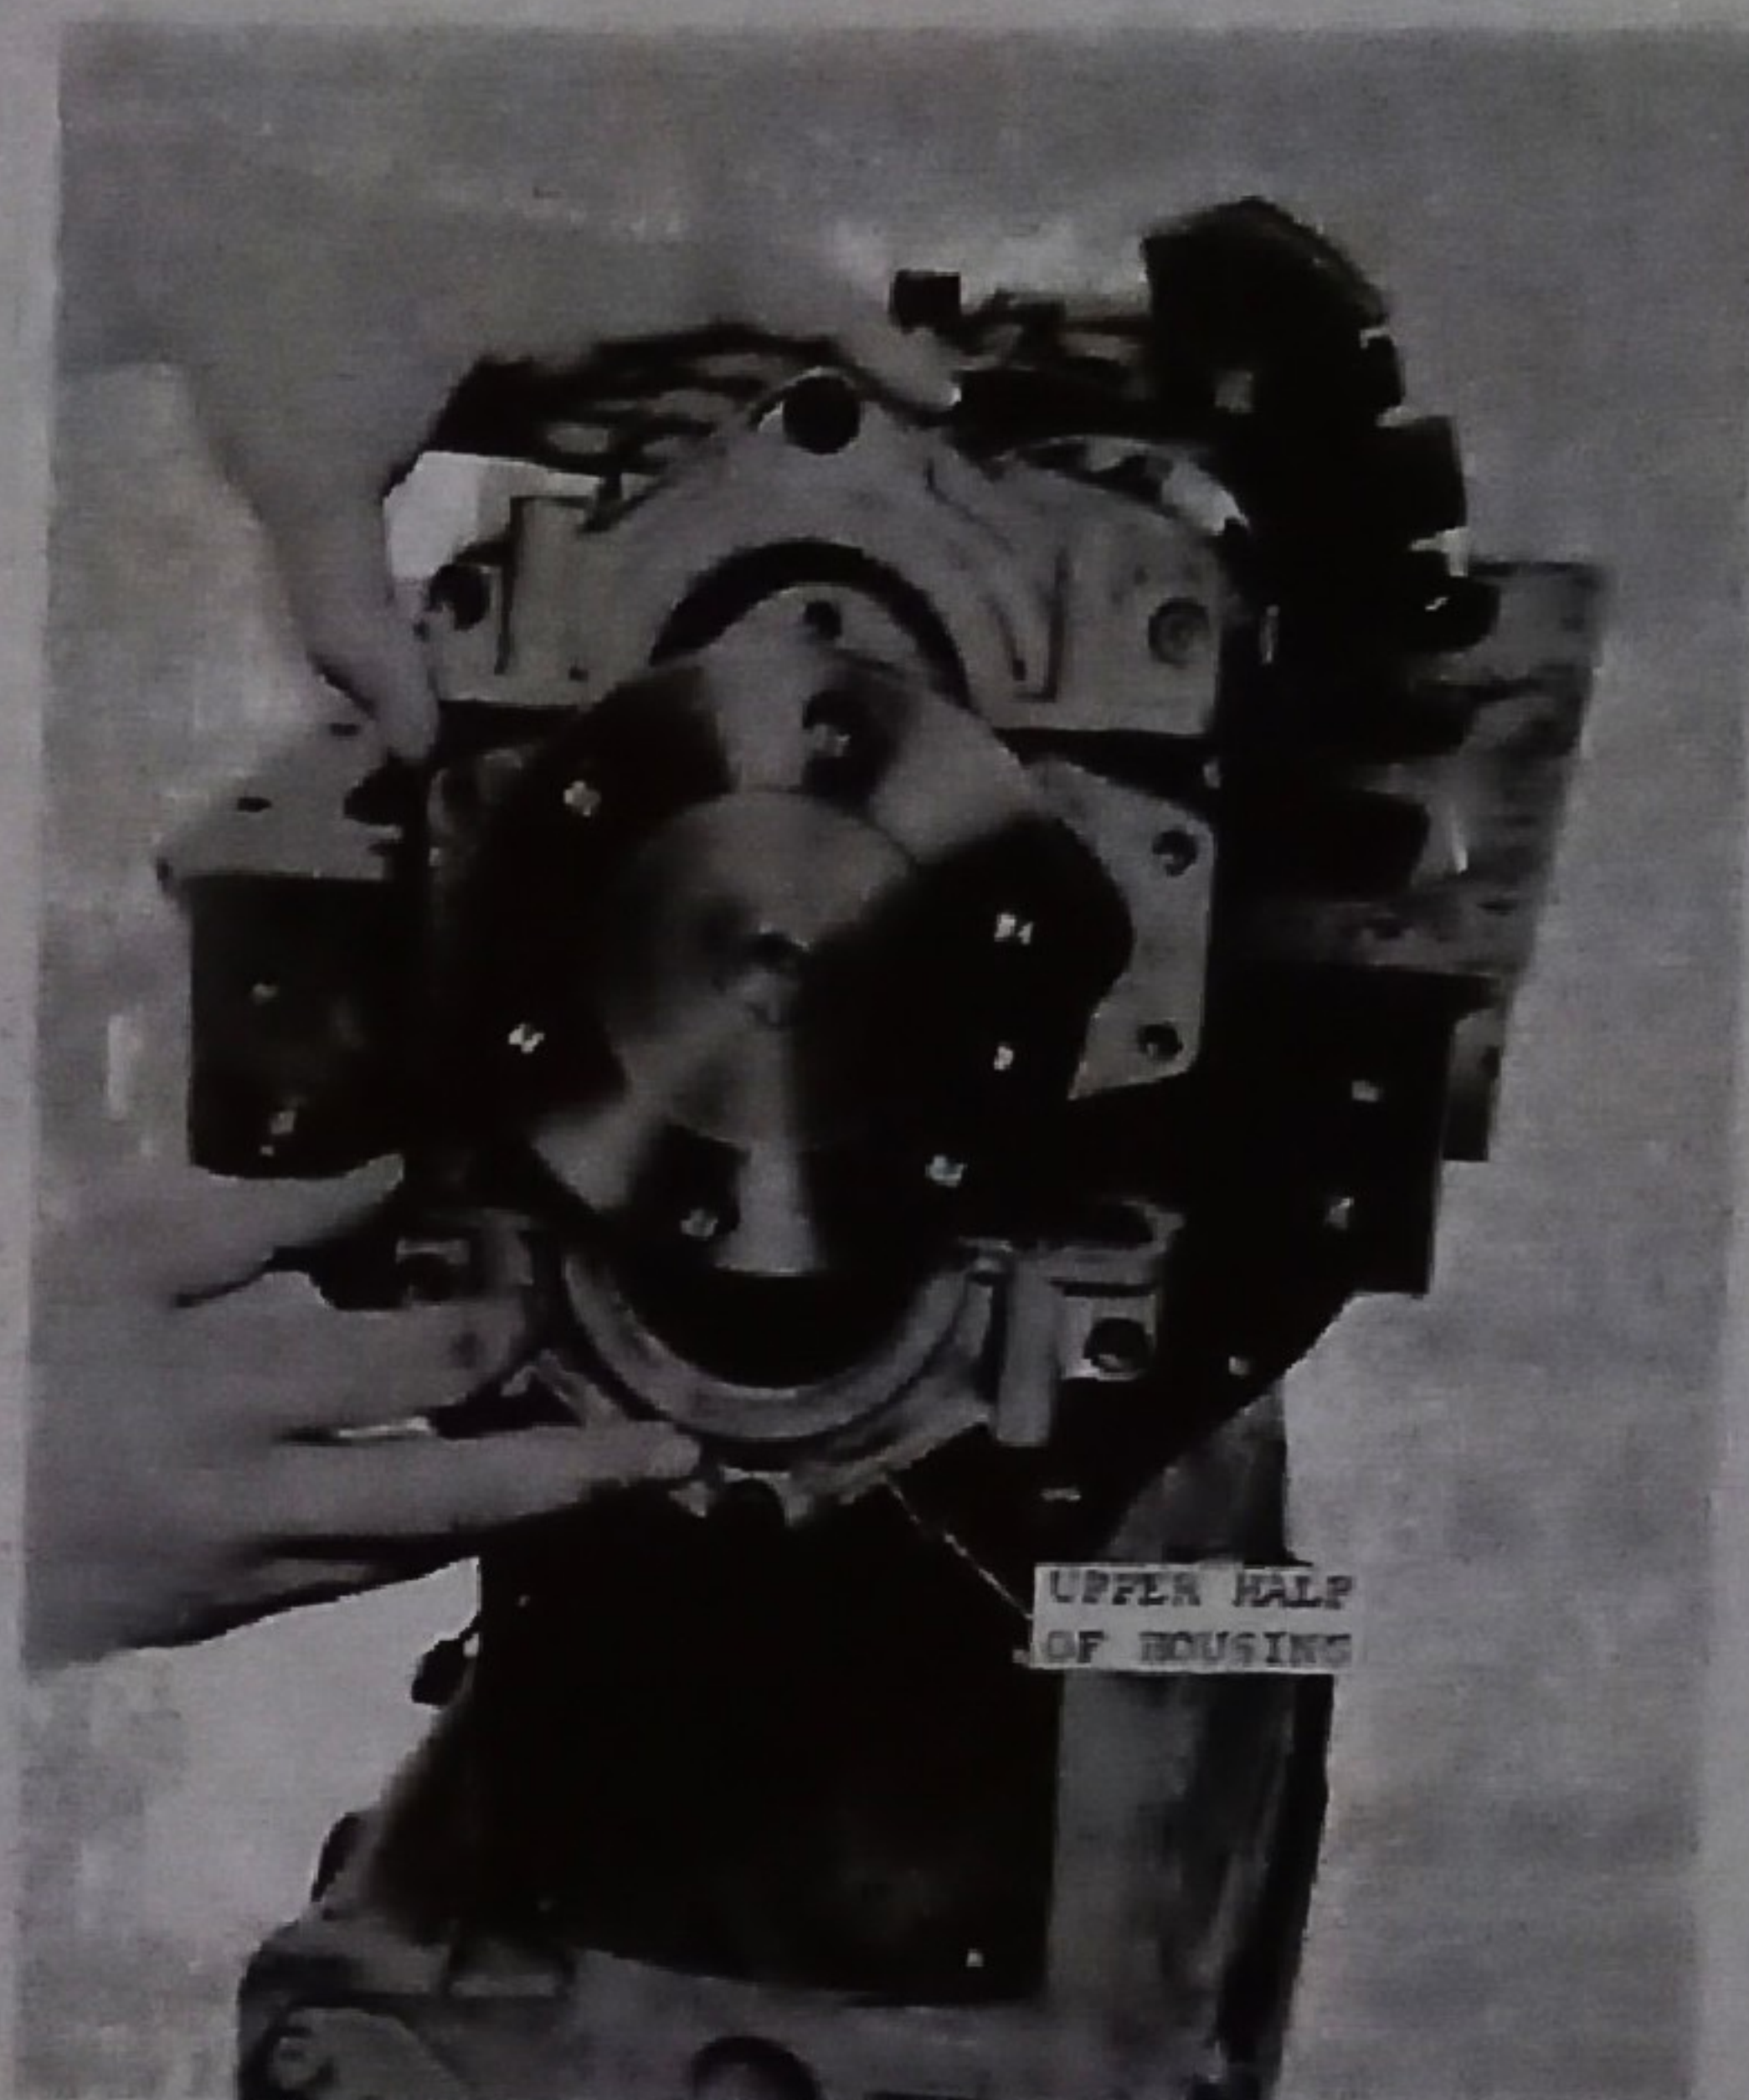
Removing or Installing Upper and Lower Halves of Oil Seal Housing (Engine Shown Inverted)
